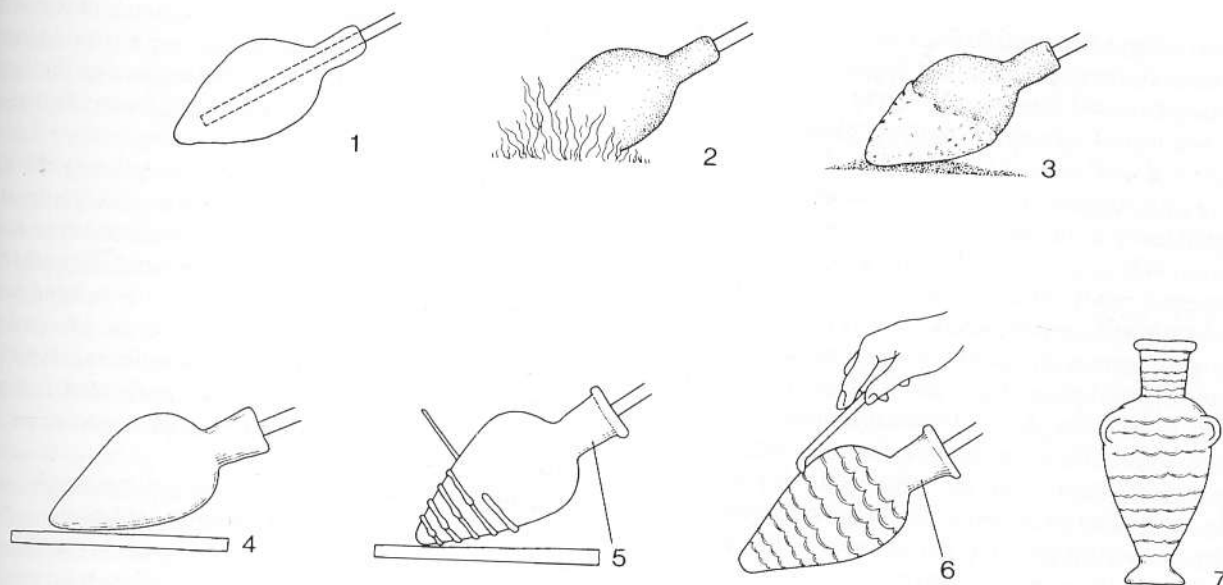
Making a glass vessel by the core forming process. 1. A core of clay and dung is formed around a handling piece. It has the form of the inside of a finished vessel. 2. The core is heated so that powdered glass will adhere to it. 3. The heated core is rolled in powdered glass and built up around the core. 4. The heated glass is rolled on a marver stone. 5. Bands of coloured glass are applied in rings around the vessel and marvered in. A similar band is added to the rim of the vessel. 6. The bands of coloured glass are pulled down with a tool to make a 'feathered' pattern. 7. The completed vessel, with foot shaped and handles added. The vessel will be annealed at this stage and the core and handling piece removed.
